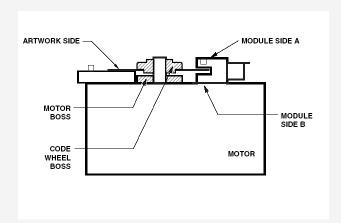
Alignment Tool is Used to Set Height of Codewheel.
